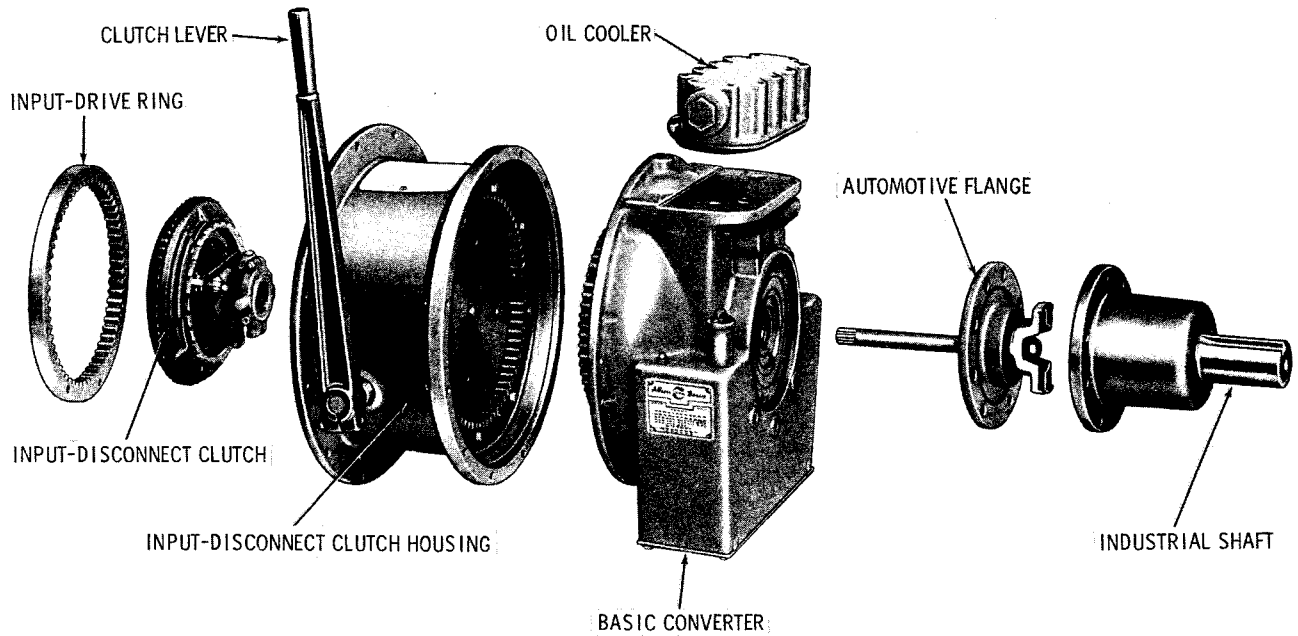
Model TCA 258 converter with oil cooler, industrial shaft, accessory drive options—left-rear view
